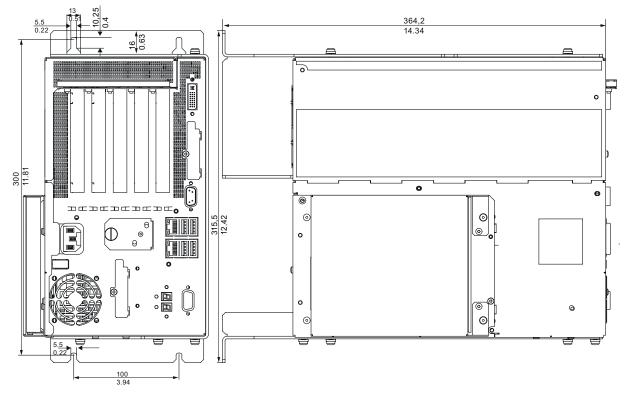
Dimensional drawing for installation with the vertical mounting kit for PC port access from the front
